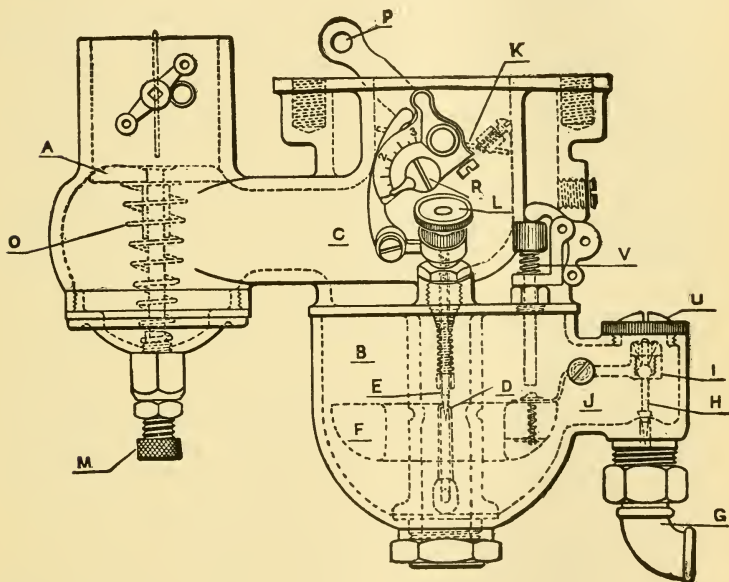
The Schebler Carburetter. A compensating air valve A, adjustable by the screw M and the spring O, controls the air supply to the mixing chamber C. Above this valve is a shutter which may be partially closed when cranking to increase the suction in order to obtain a rich mixture. The spray nozzle is located at D and the supply regulated by the needle valve E by means of a thumb wheel L. The needle valve has two adjustments, one for high speed and one for low. At R is the eccentric high speed adjustment. Throttle valve K is of the butterfly type and is operated by the lever P. Heating is secured by a jacket surrounding the throttle. Gasoline enters the float chamber B through the elbow connection G. The fuel level is maintained by the concentric float F, which regulates the supply by the inlet valve H and the lever connection J. The float point is adjustable by the needle valve adjusting screw I, accessible by removing cap U. The carburetter is primed by the tickler or flushing pin V.
